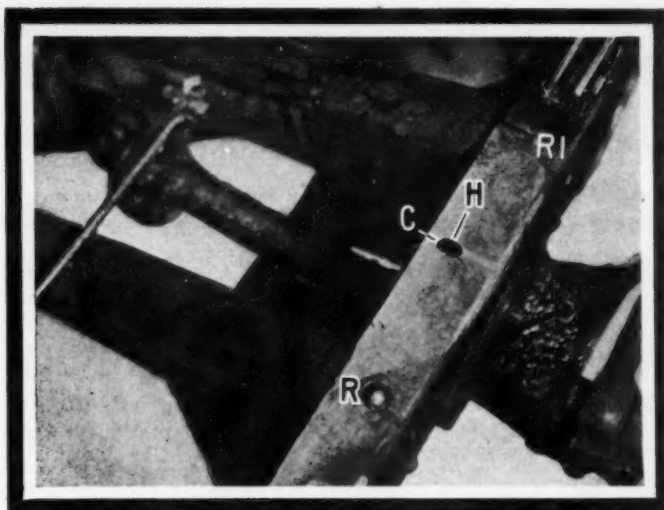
Frame badly drilled for fixing body, and owing to excessive weight caused the frame to crack
